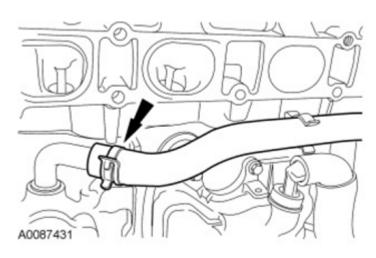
Locating Coolant Hose Courtesy of FORD MOTOR CO.
